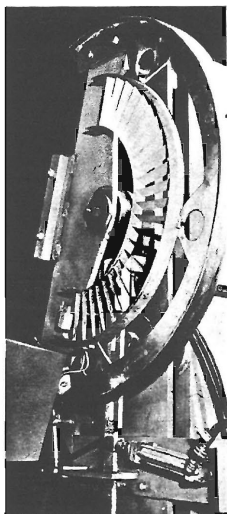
R-F semiautomatic brazing of jet-engine turbine blades. (*Westinghouse Electric Corp.*)
